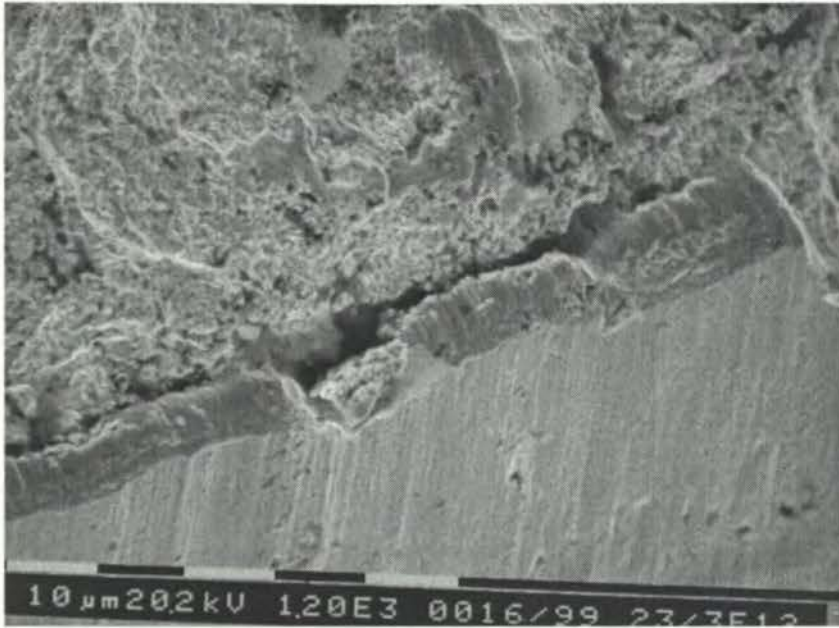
108 Crack running parallel to the cutting edge of a failed KC720 tool with smooth flank wear after cutting Waspaloy for 5 minutes at 75 m/min and 0.08 mm/tooth
